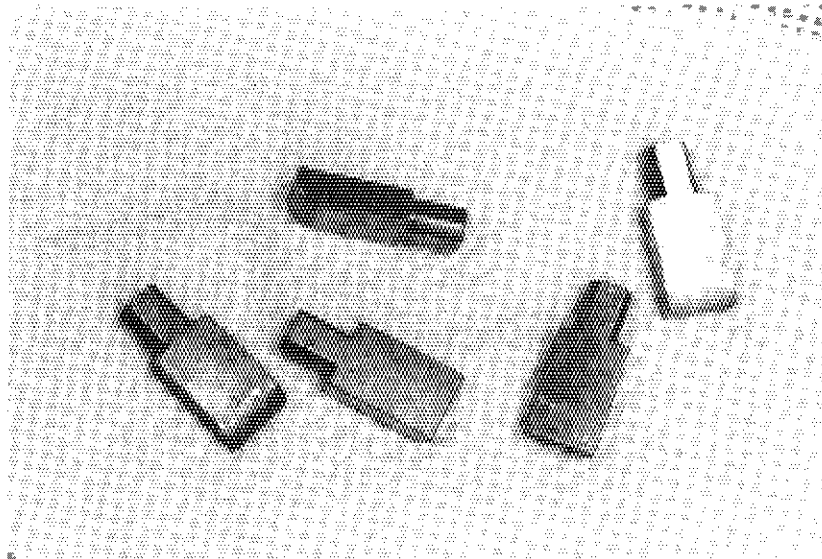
Jigs to be used to assemble/disassemble each motion transfer shaft of the slave arm
